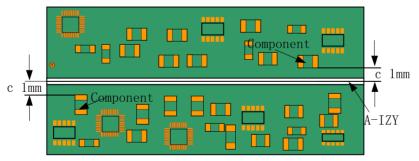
Clearance area requirements for PCB panels undergoing automated depaneling.
